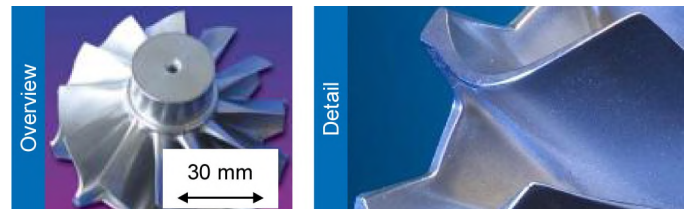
ECM machining of complex geometries like complete turbine wheels for turbolader charger applications [72].
